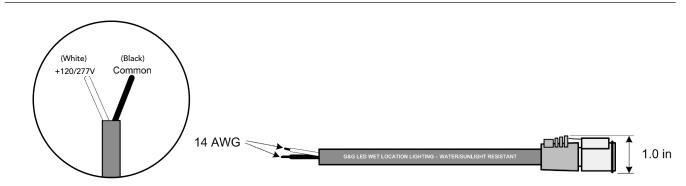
and 6.2: Leader Cable Dimensions and Wiring
